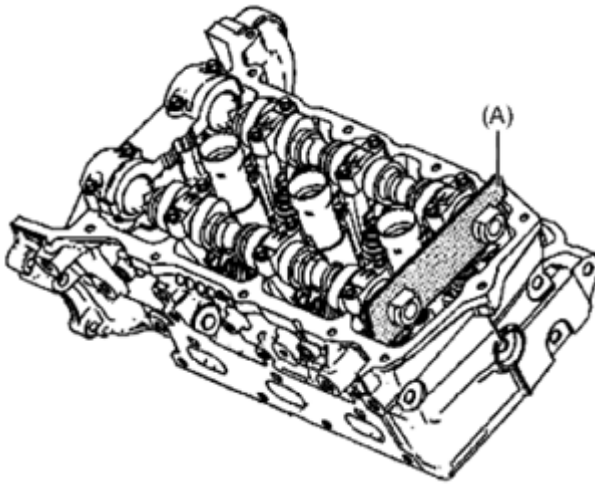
Identifying Flat Sections Of Camshafts (Bank 2)
